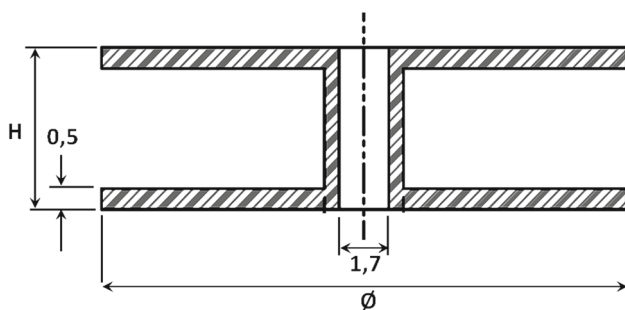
Geometry of coils used in CMBN probe (dimensions in mm)
